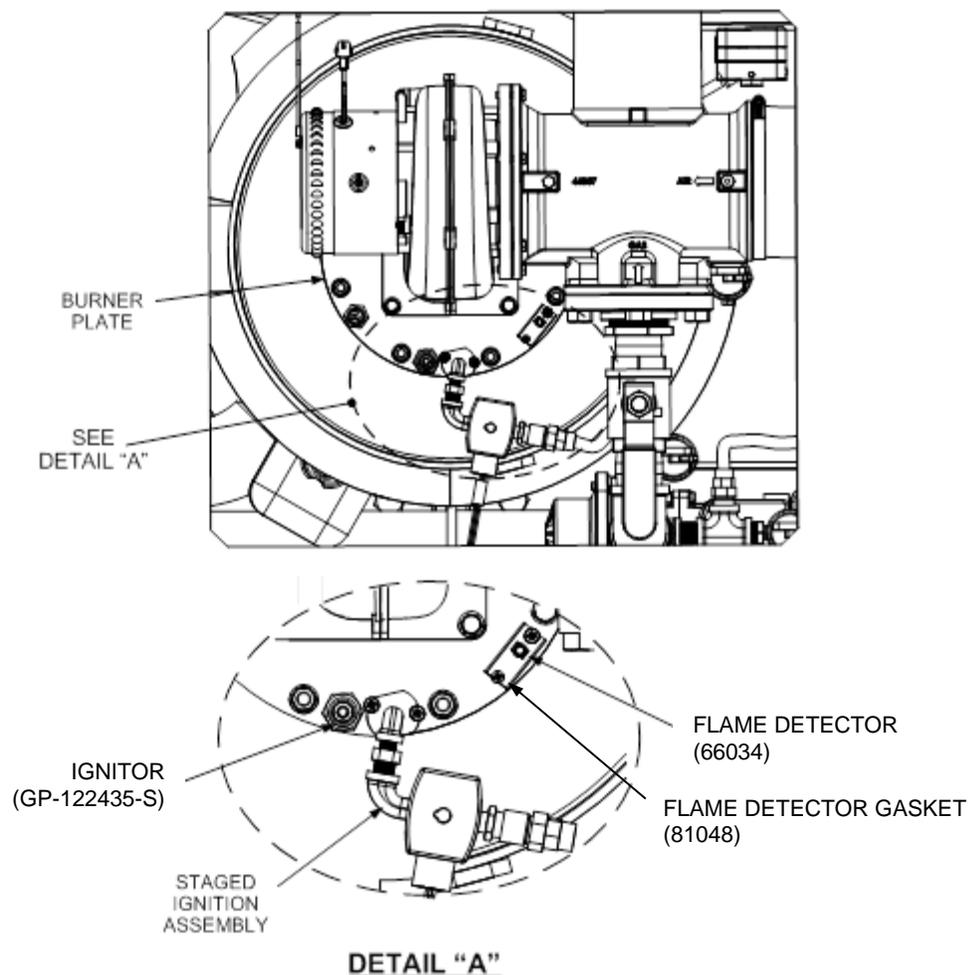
Burner Assembly Igniter & Flame Detector Locations
